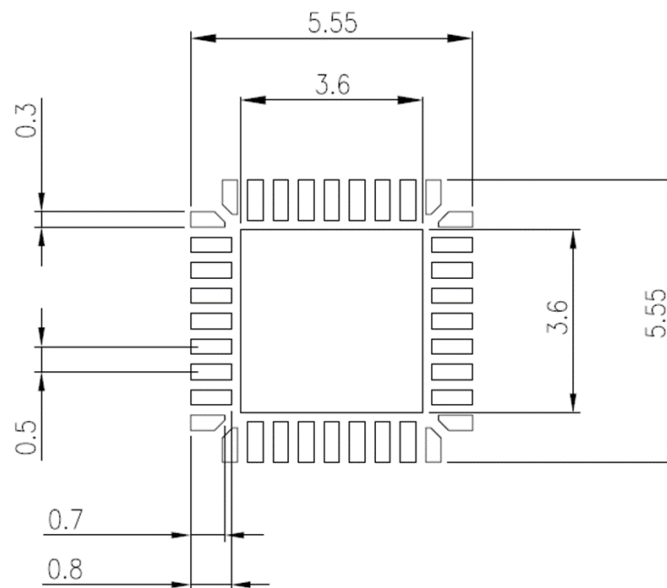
Land pattern dimensions (for reference only): P-WQFN36-0505-050-001
